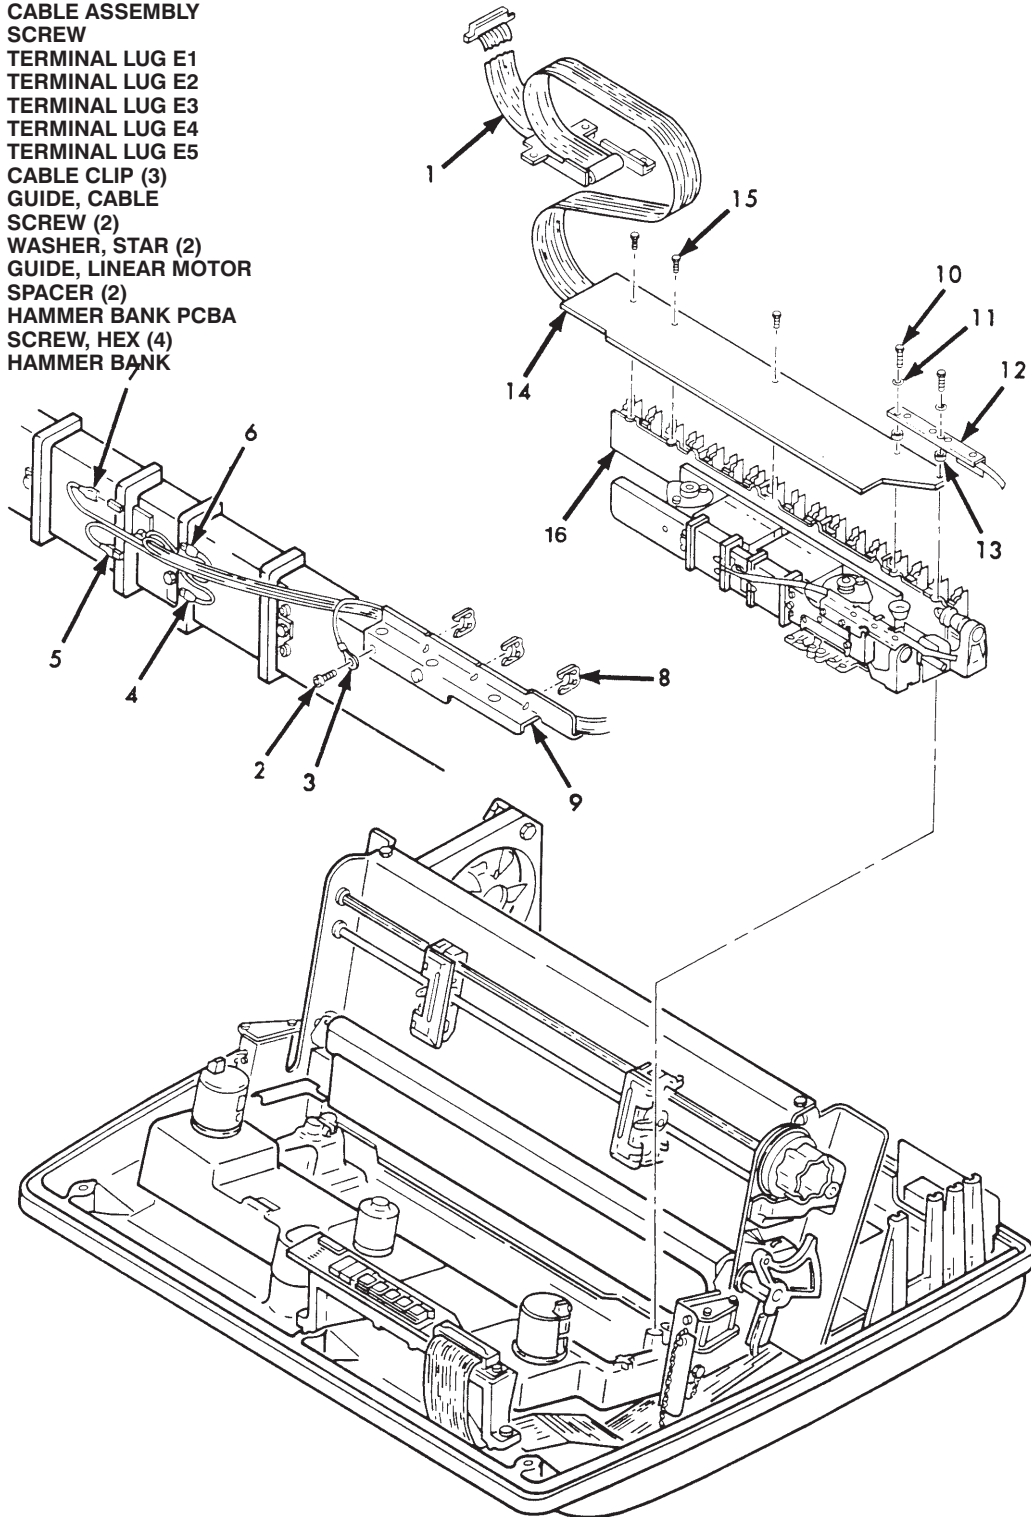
Hammer Bank Cable Assembly Removal/Installation
